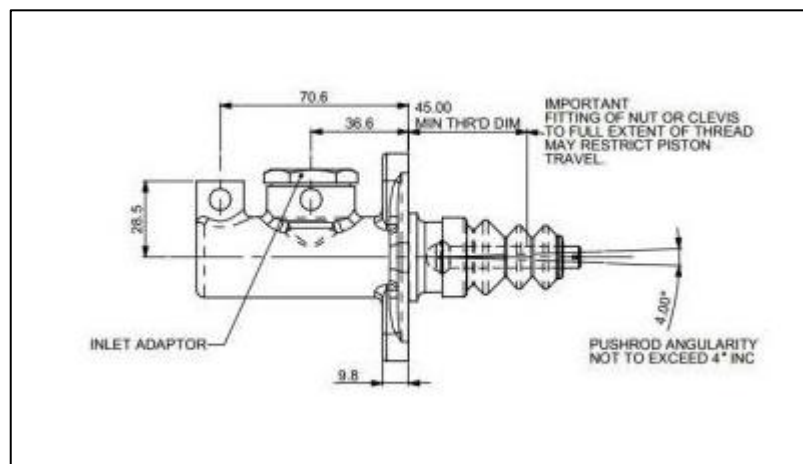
Brake Master Cylinder. Adapted from [29]
